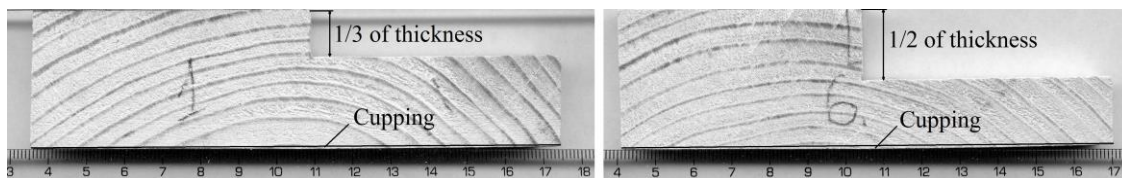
Samples simulating asymmetrical machining wooden workpieces
